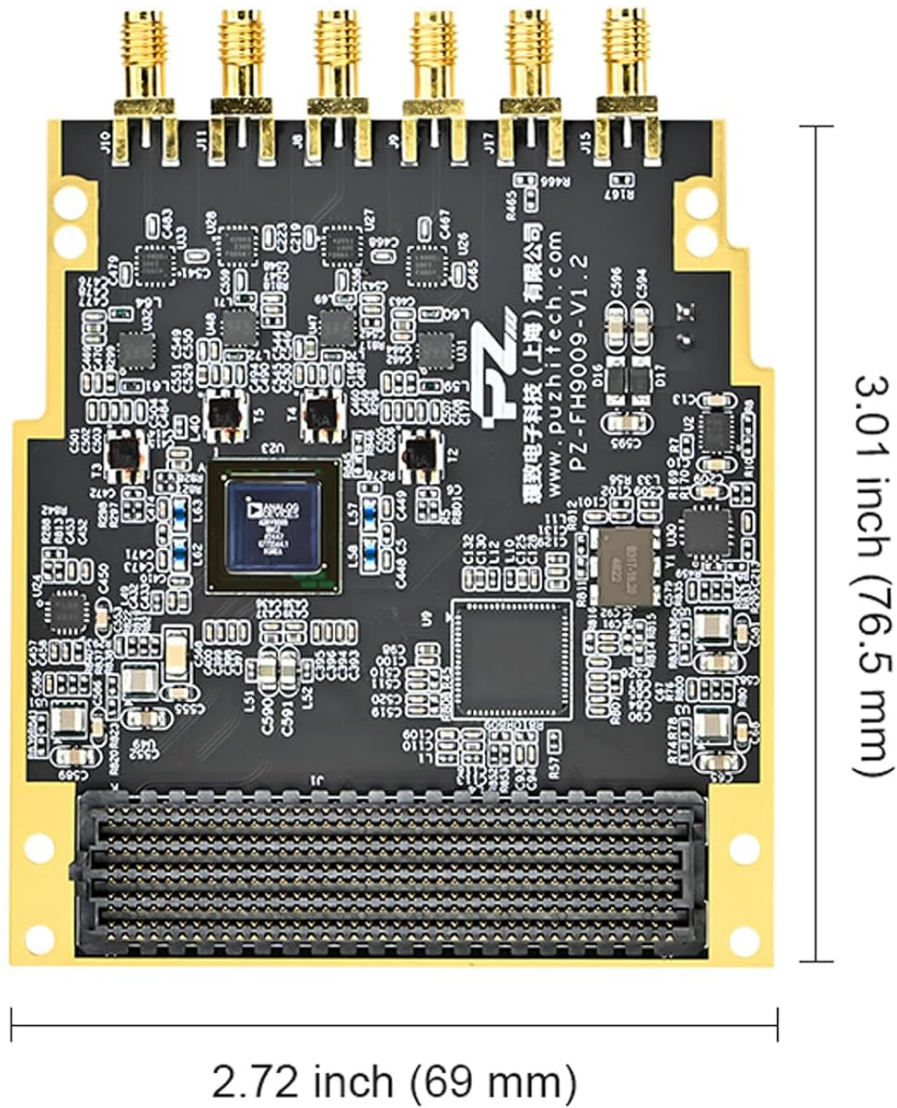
Physical dimensions of the PZ-FH9009 FMC Module, showing length and width measurements.
